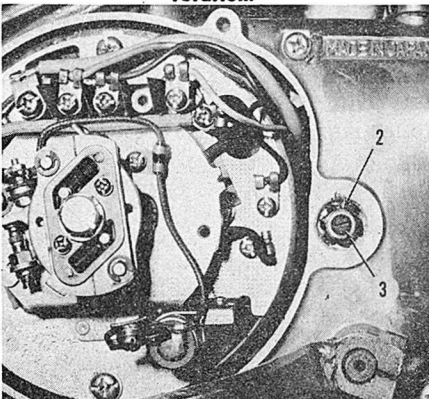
Remove left engine cover for access to clutch adjustment screw.
